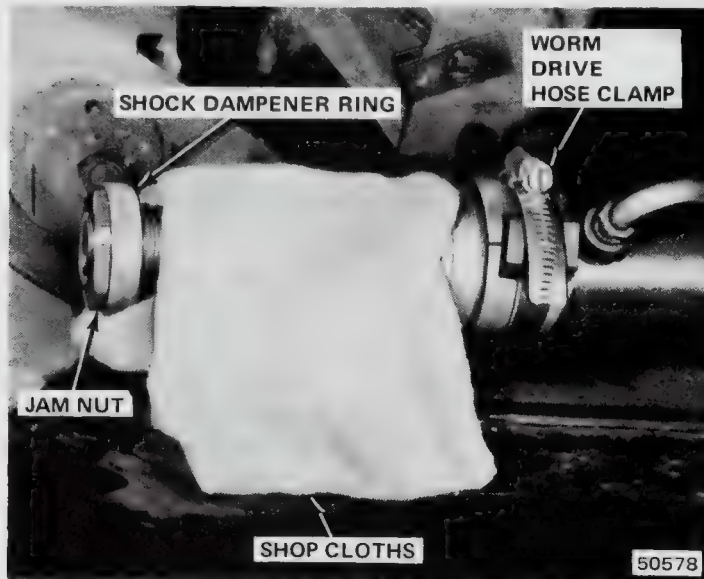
K-50 Installing Hose Clamp, Rubber Seal, and Shop Cloths
